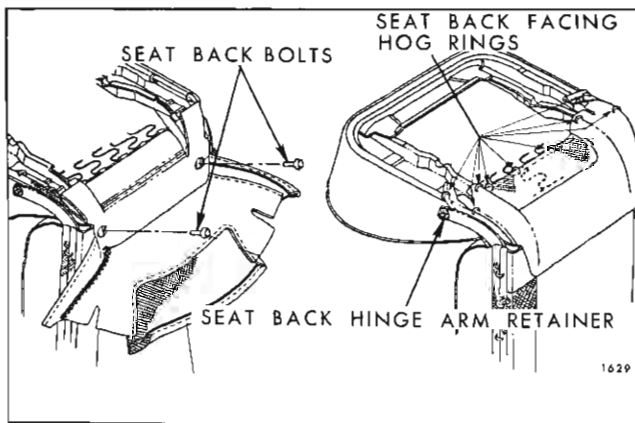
H20—Front Bucket Seat Back Attachment (63339 Style)
